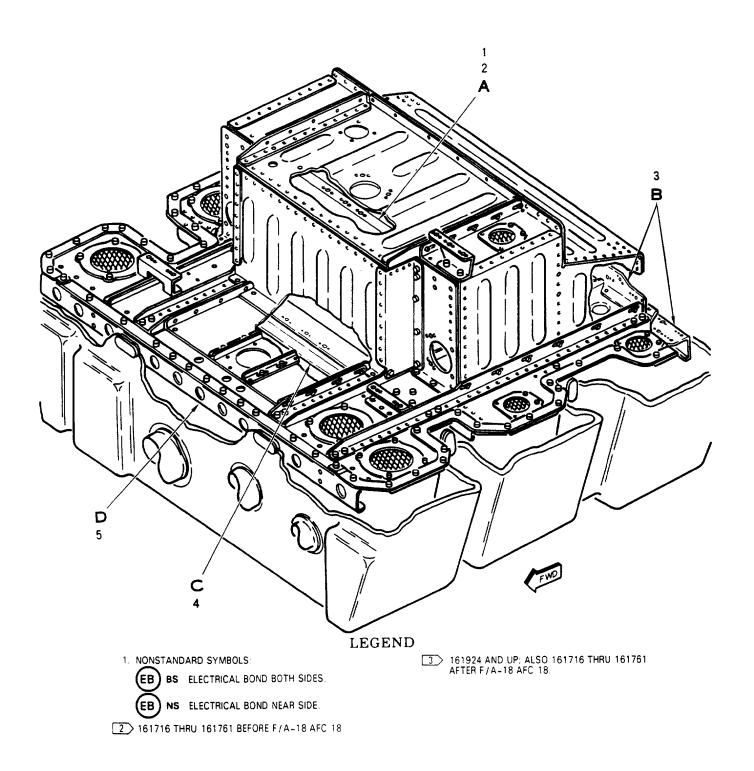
Upper and Lower Support Assemblies (Sheet 1)
